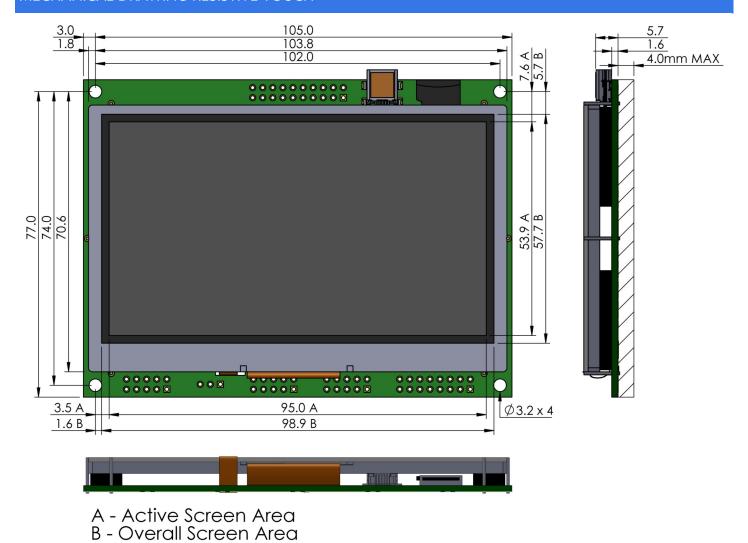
TU480x272C-K61XA1RU Mechanical drawing. Reference dimensions only.
